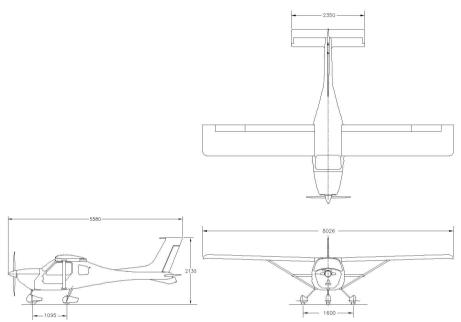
Three View of the J120 Note: *All dimensions in millimetres
